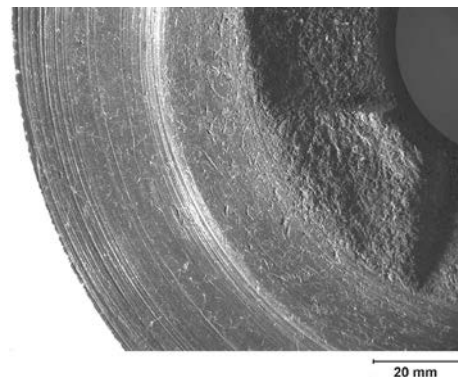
Optical macrograph of a segment of the attrition mill wear plate showing gouging abrasion near the inner ring and grinding abrasion near the outer ring
